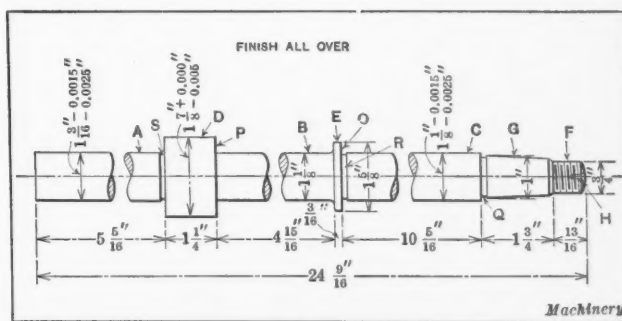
Pinion-shaft which is manufactured by Means of the Equipment shown in Fig. 26
